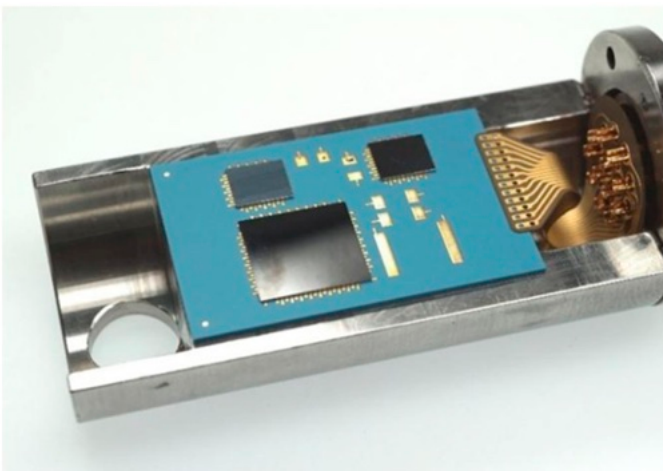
Ceramic circuitry board (board dimensions  $30 \times 20 \times .85 \text{ mm}^3$ ).
